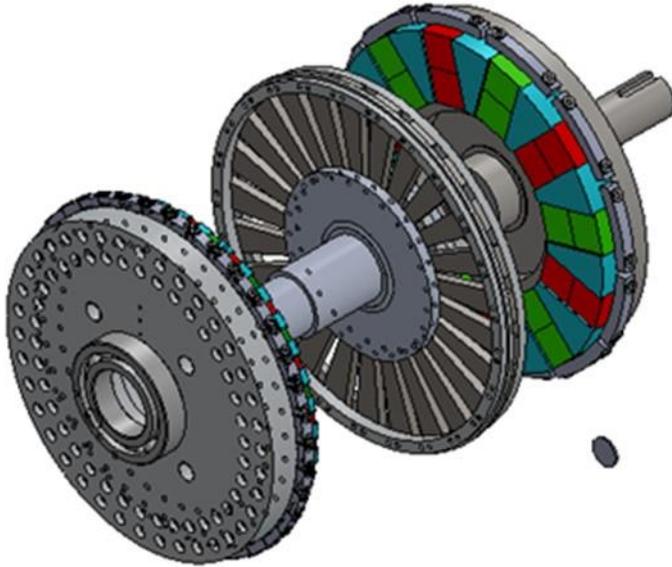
Example of an axial-flux-focusing magnetic gear, showing a low speed rotor, spoke rotor, and high speed rotor. Green and red correspond to magnets of opposite polarity in this figure.
